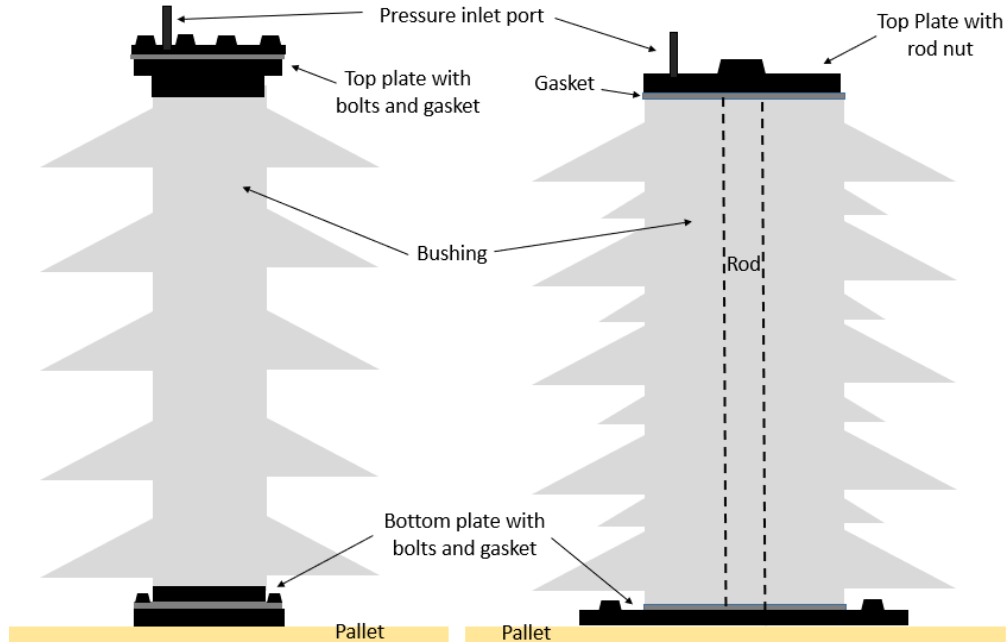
Bushing mounting style for bolt-mount (left) and rod-mount (right).
